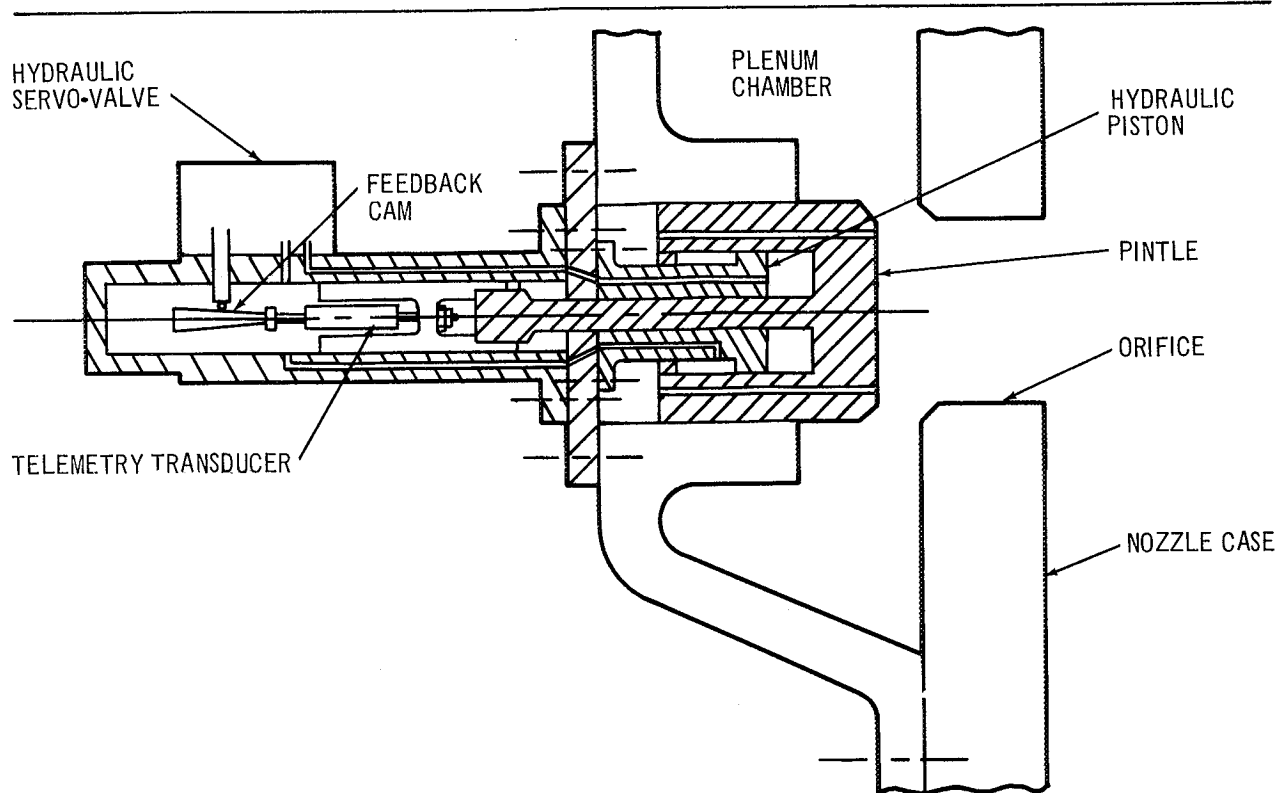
Hydraulic Servo-Actuator Hot-Gas Pintle Assembly
